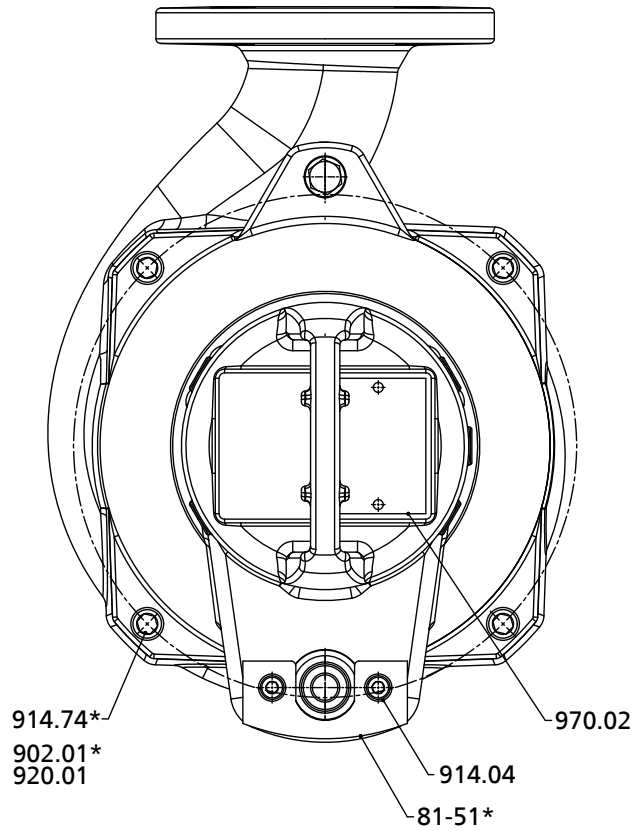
Motor and fastening elements for the cable glands Amarex KRT, motor type 1
